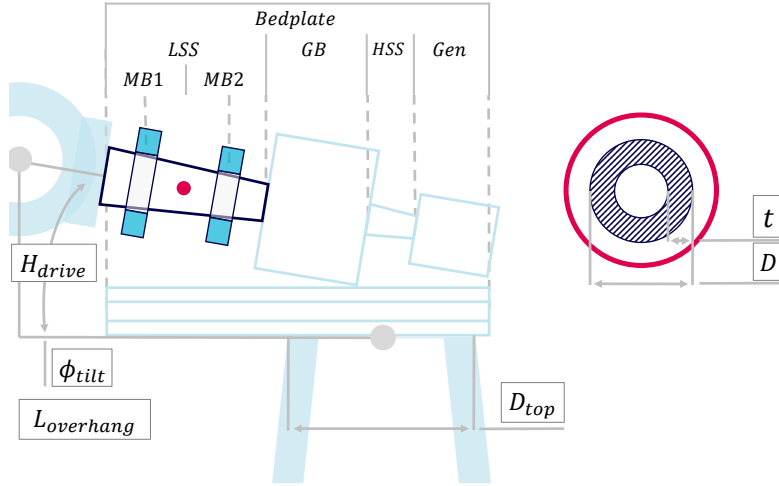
Geared Drivetrain Layout for the Made4Wind 15MW
